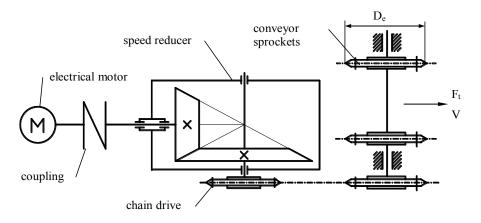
Fig. C. Design a chain conveyor mechanical drive. If turning force Ft, peripheral speed V at well as diameter of sprockets D are given (Table A).
